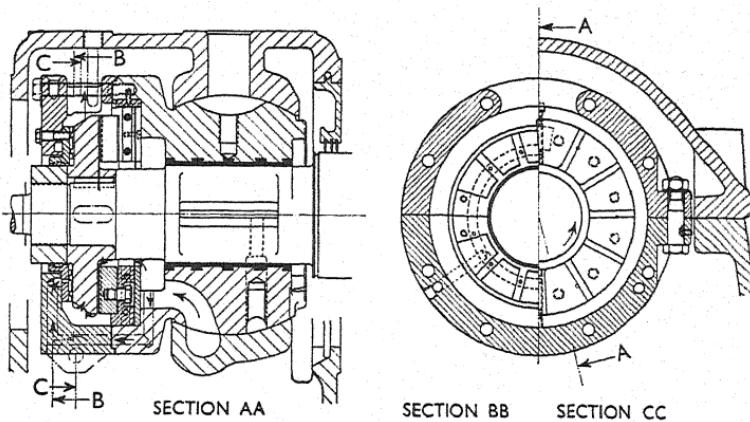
Pad Thrust Bearing for Mainly Unilateral Thrust for a Steam Turbine (Allgemeine Elektricitäts Gesellschaft)
